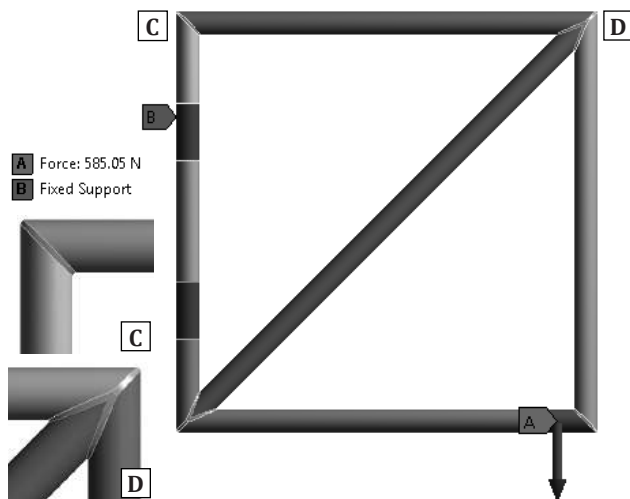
Tubular Welded Frame – Solid modelling including welds
